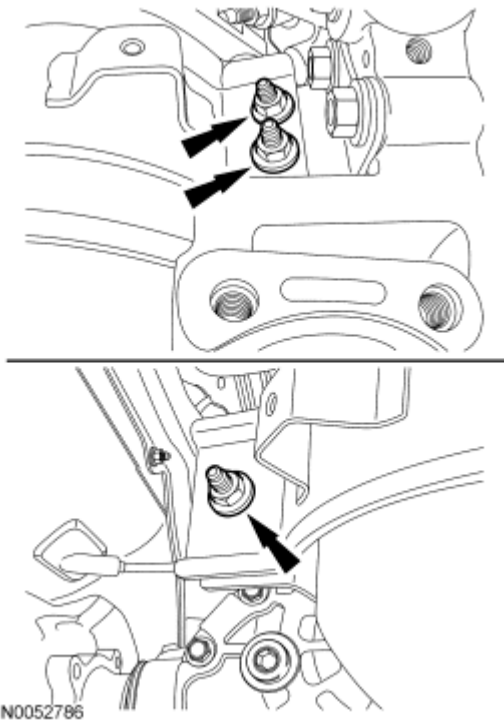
Locating RH Exhaust Heat Shield Bracket Nuts - Inboard Half
